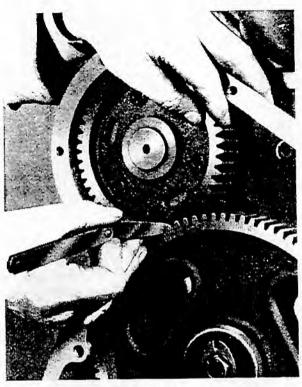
CHECKING CAMSHAFT AND IDLER GEAR BACKLASH
